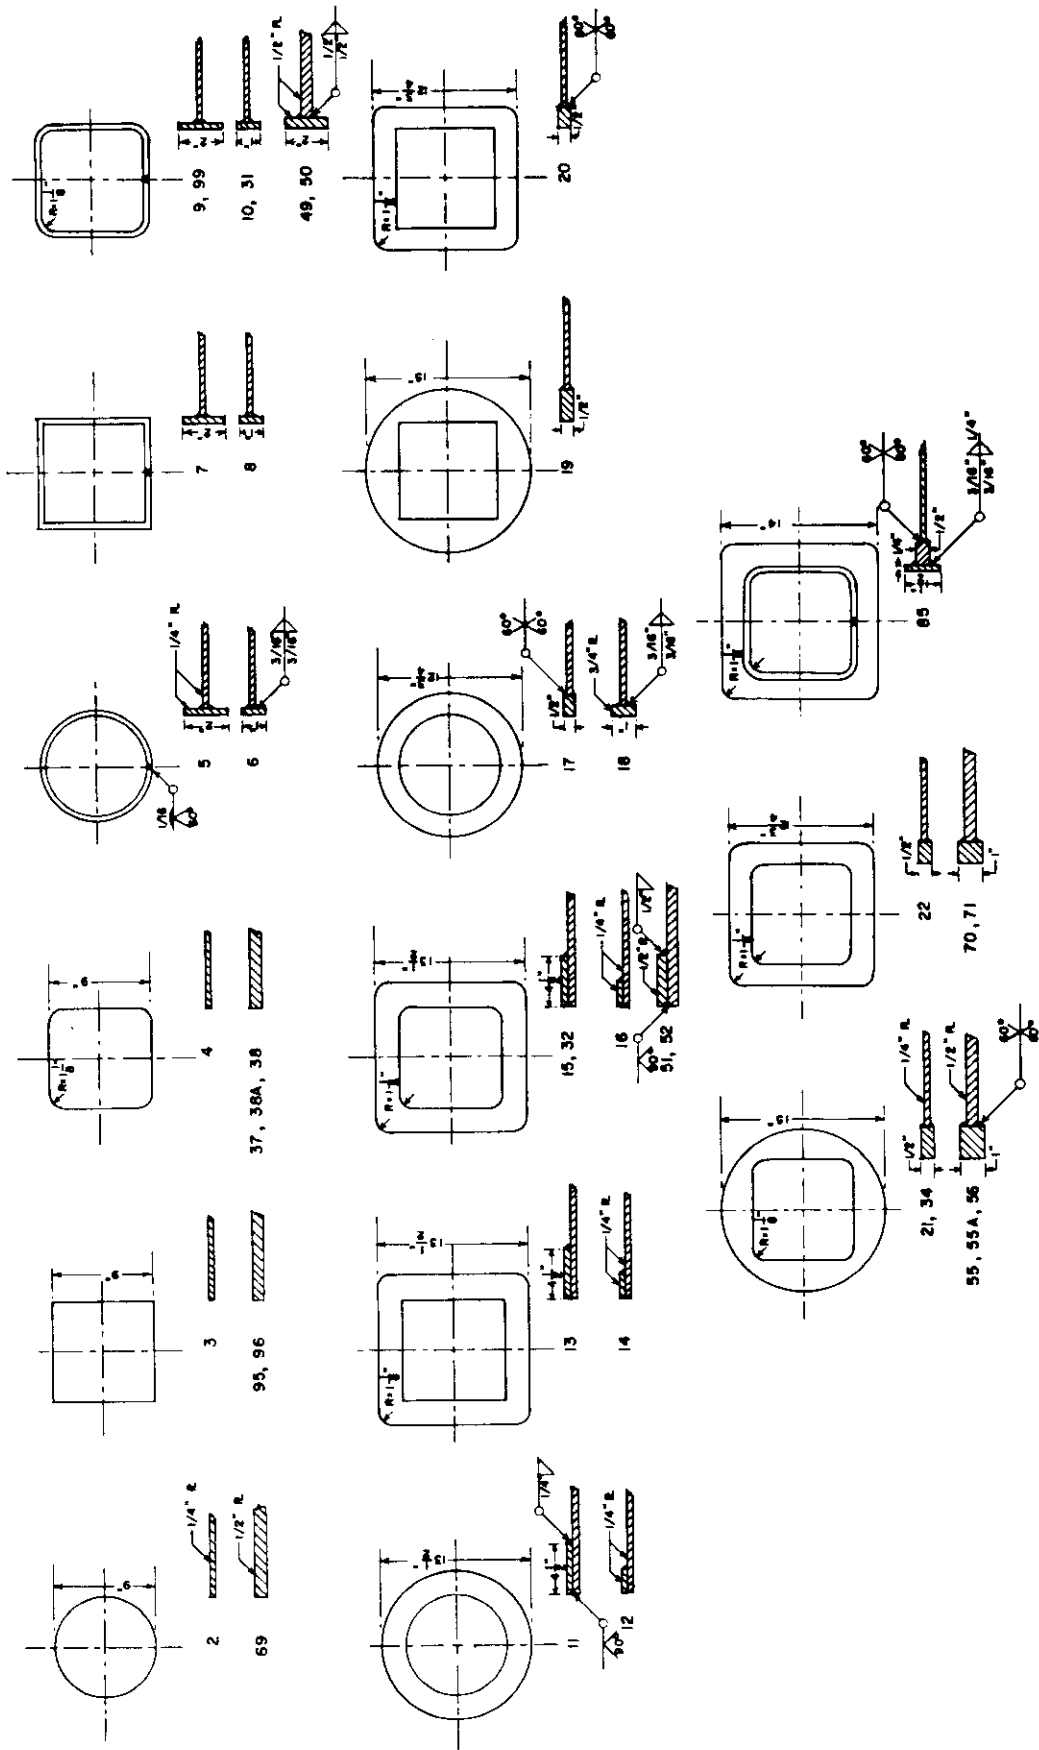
DETAILS OF OPENING AND REINFORCEMENT
